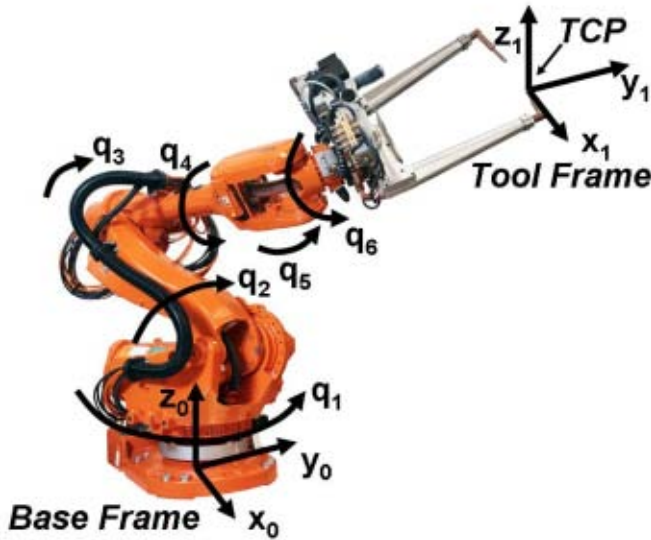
Base frame, tool frame, and joint positions illustrated on a robot equipped with a spotwelding gun.
